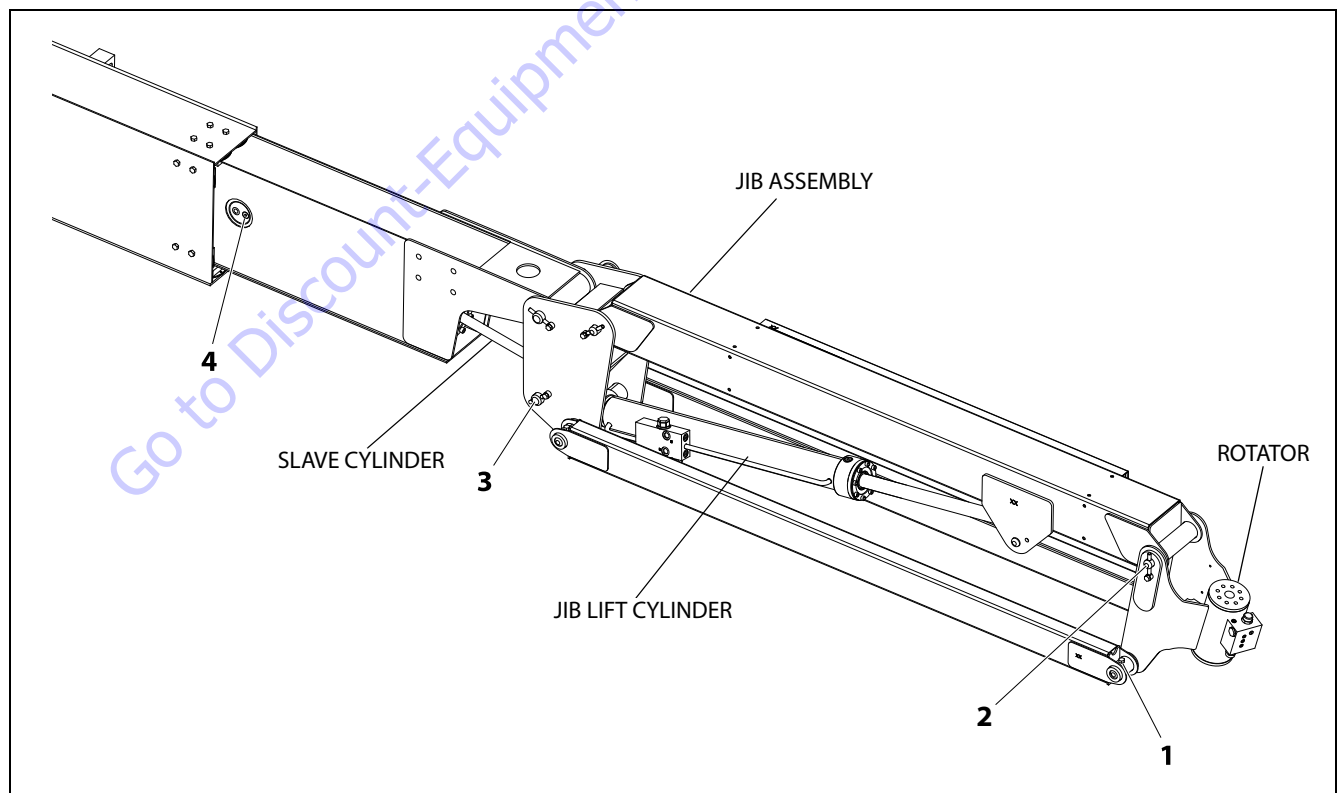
Location of Components-Rotator and Slave Cylinder
